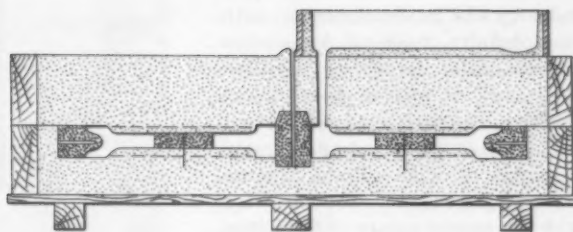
Cross section view of closed mold for 30-in. diameter sheave.
